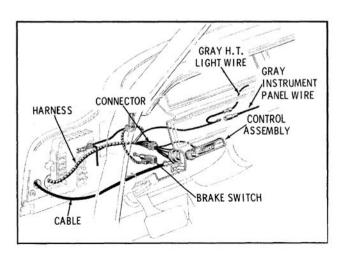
Control Assembly Wiring (33, 34, 35, 36, 38 & 39)
